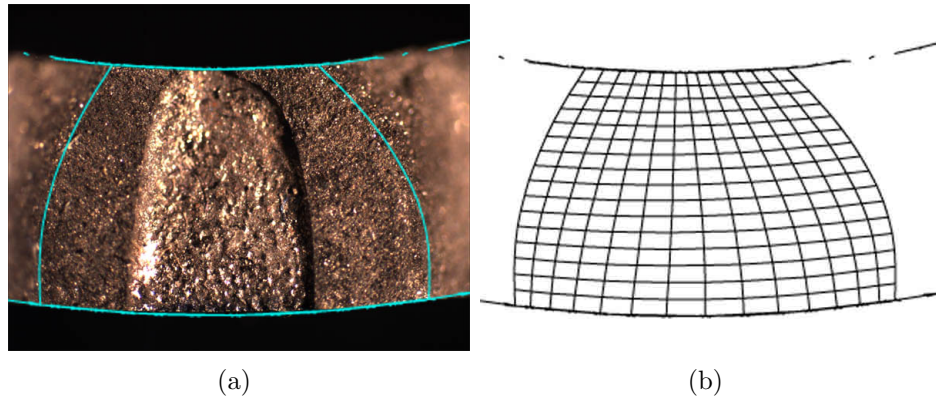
(a) Fractograph with BEM geometry superimposed and (b) BEM mesh of pre-crack for specimen N03.
